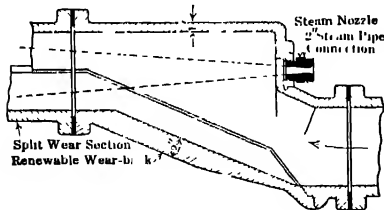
Single-jet "Booster" (United Conveyor Corporation).
